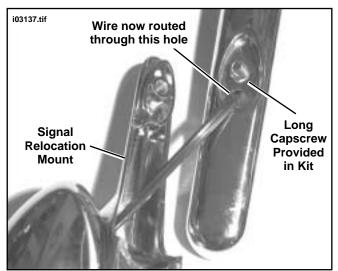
Route Wiring and install Signal Relocation Mount to Strut
